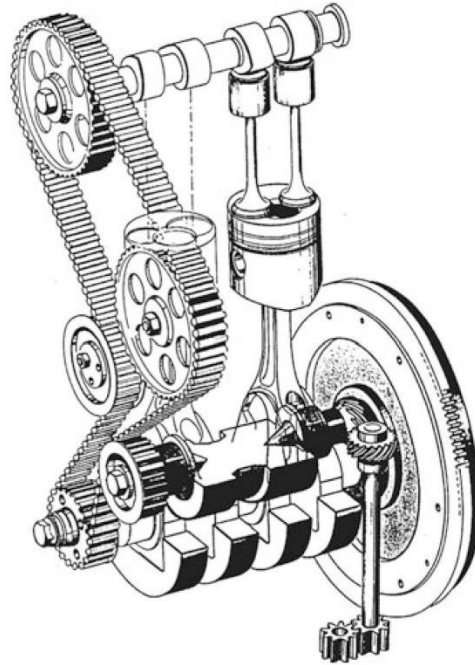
Engine crank-mechanism (Tschoke et al., 2010)
